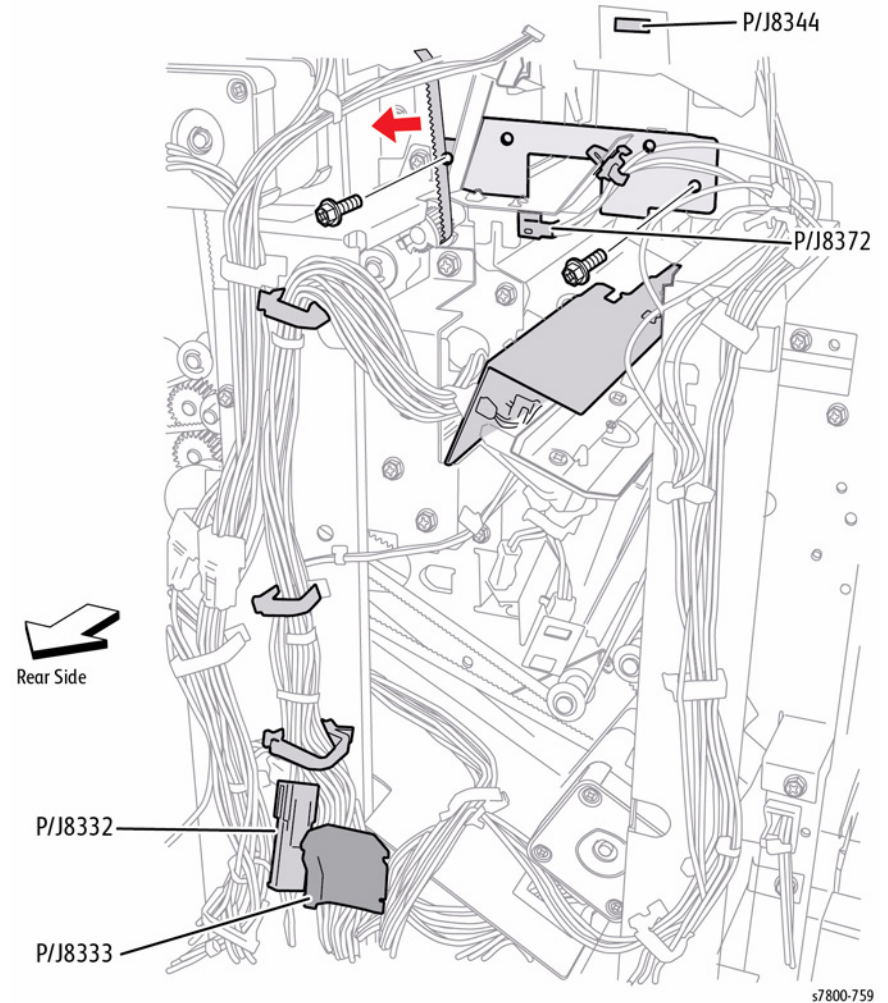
Removing the Punch Frame Assembly (Rear Side of Finisher)
